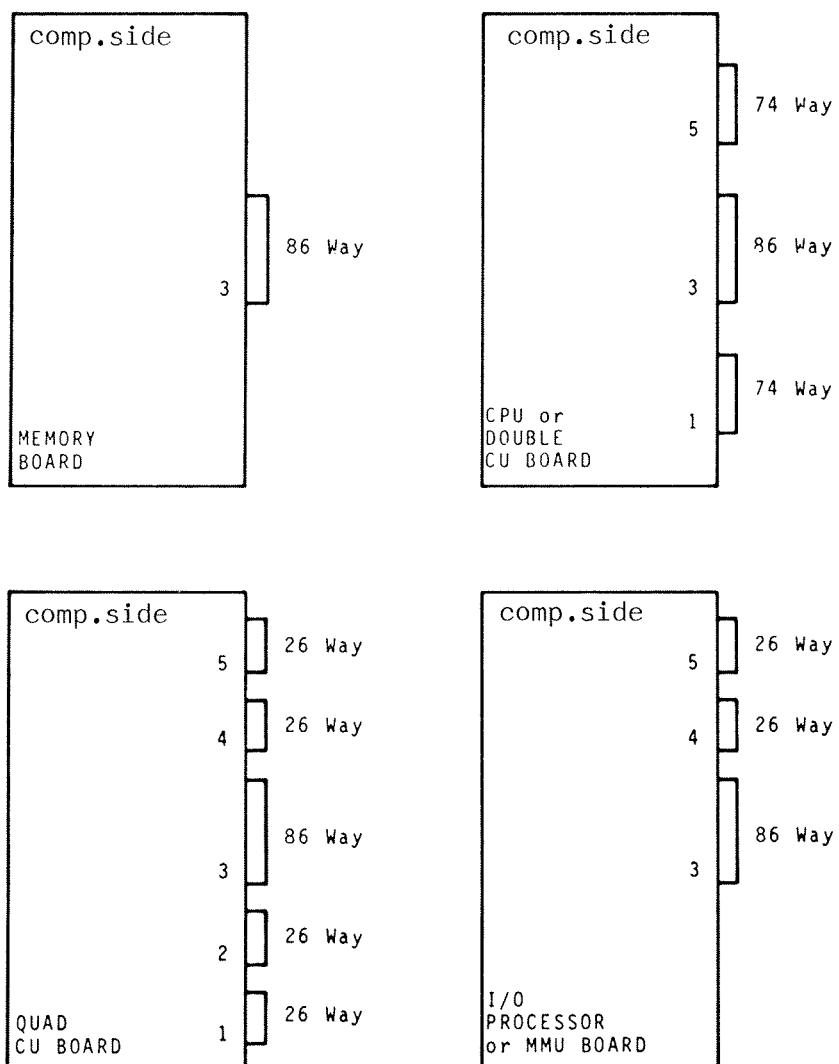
PRINTED WIRING BOARD-CONNECTOR LAYOUT
